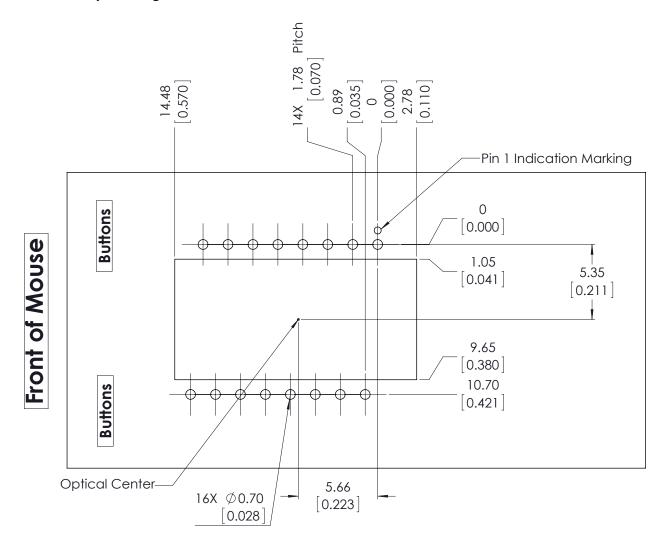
Recommended chip orientation, mechanical cutouts and spacing (Top View)
